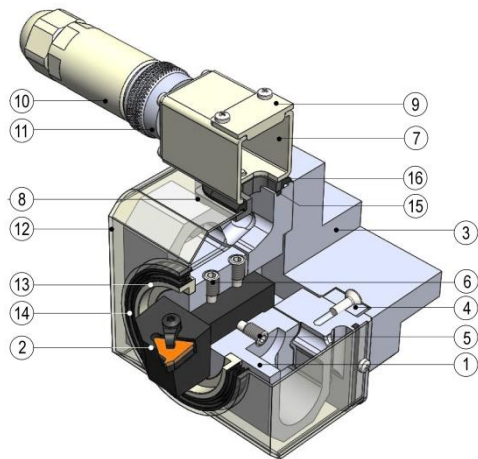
Assembly of proposed 3-component tool dynamometer for turning
